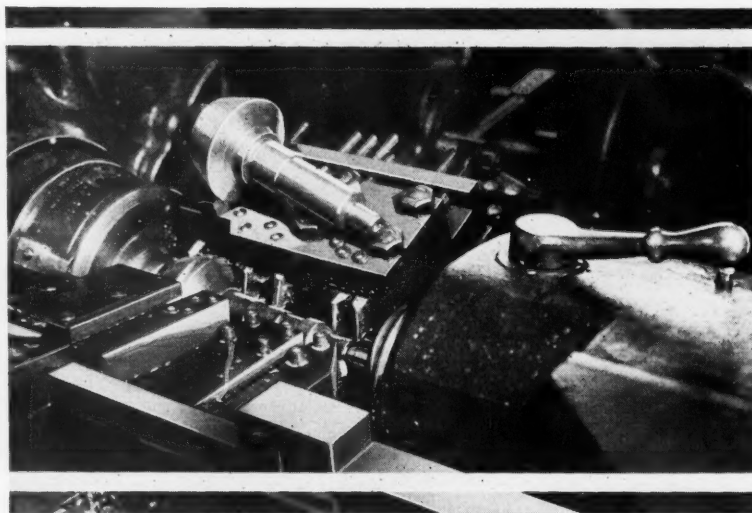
Machining Stem Pinions on a Seneca Falls Automatic at the Packard Motor Car Co.'s Plant
